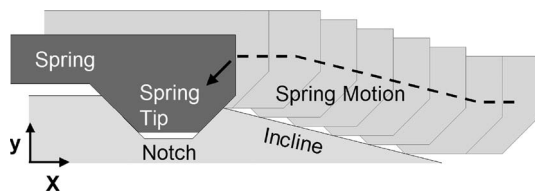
Motion of a spring tip during assembly. After traveling on the edge of the twisting component, each spring tip falls into a v-shaped notch to lock the assembly.
